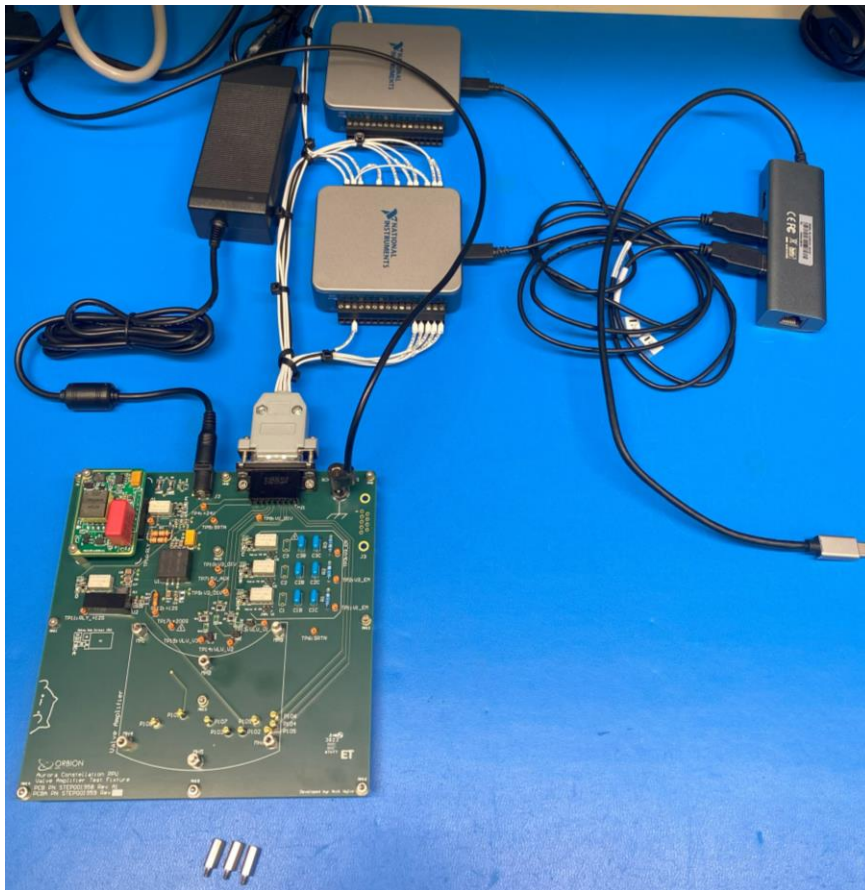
Complete test setup of the PPUP002026 Test Fixture. PCBA, Harness, DAQs, and DC supply shown. USB cables present to connect to computer.
